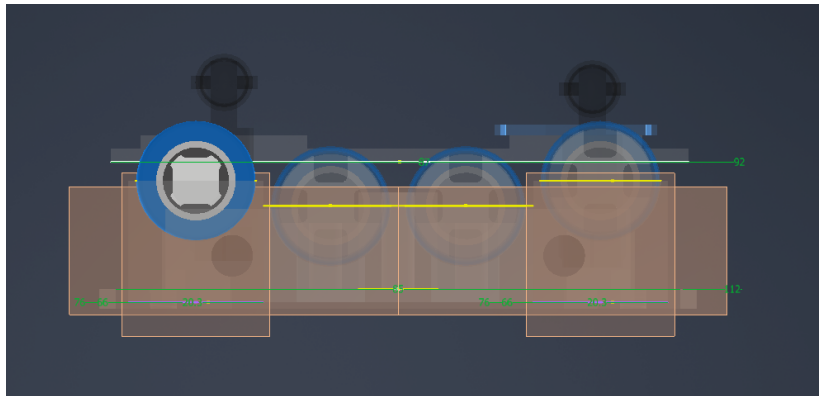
Threaded-rod integration: raised edge cells preserve rod clearance and structural alignment. Authors' own CAD.
